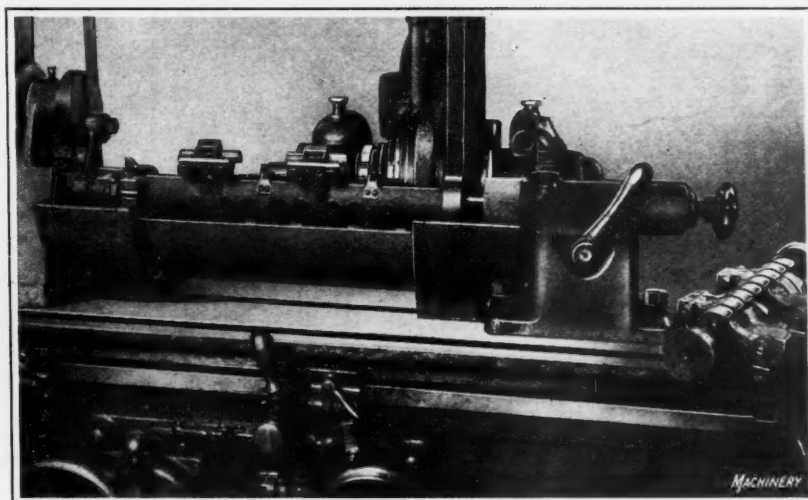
Cylindrical Grinder with Special Equipment for grinding the Curved Surface of Valve Followers
